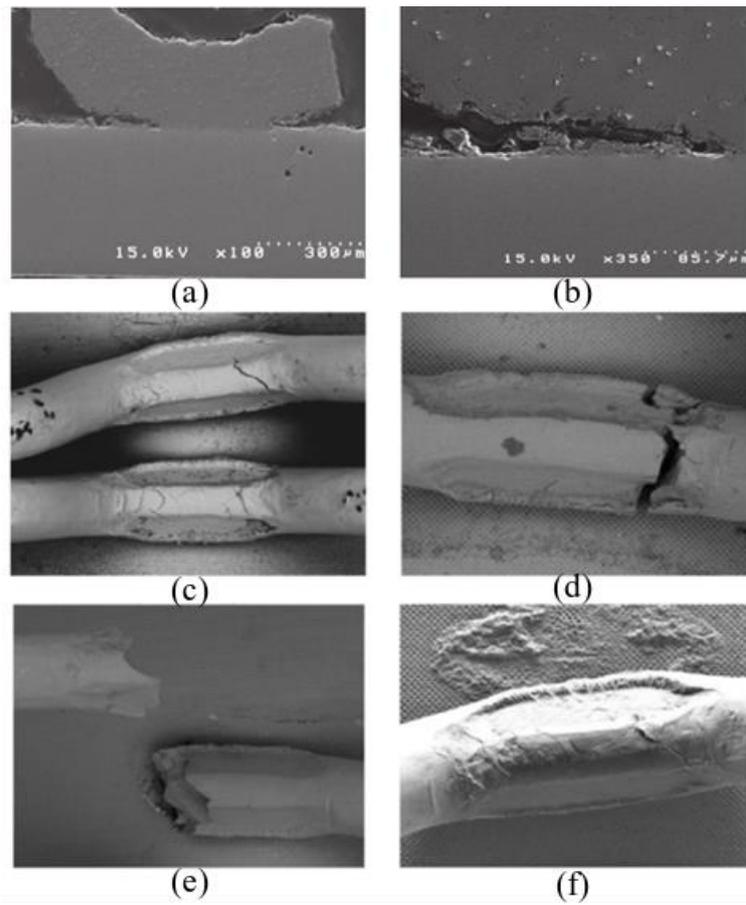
Damaged bonding wire. a) Cracked bonding wire full scale cross section [133], b) zoomed-in scale of (a) [133], c) foot crack [165], d) heel crack [165], e) fracture [165], f) lift off [165].
